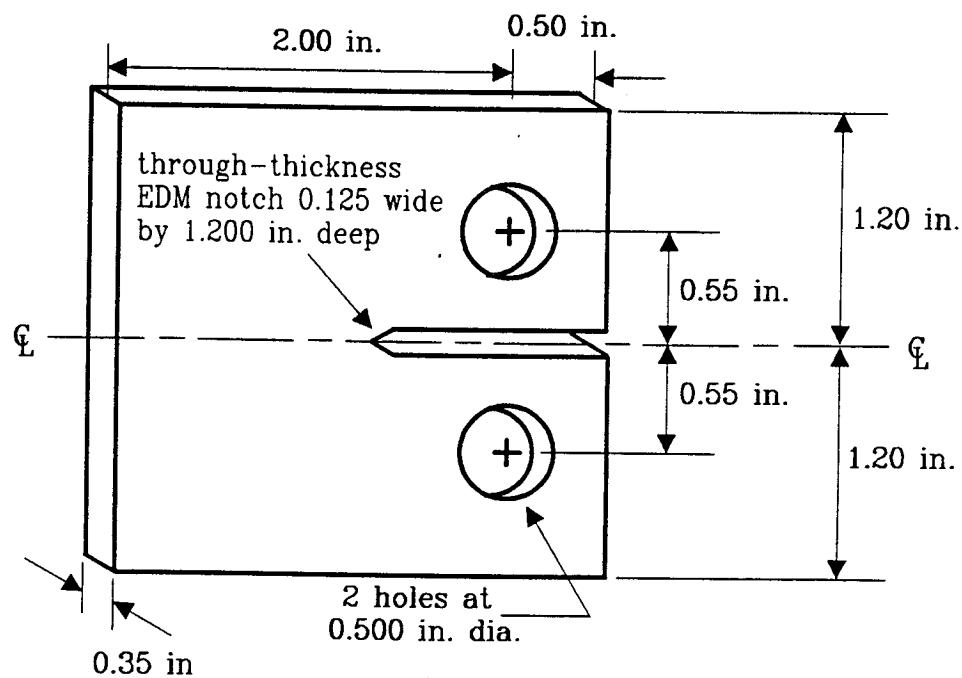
Full scale schematic diagram showing the geometry and dimensions of the C(T) test specimen.
